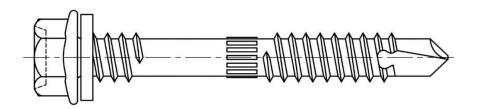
PARTIALLY THREADED FLANGE HEAD DRILLING SCREW WITH CAPTIVE WASHER
